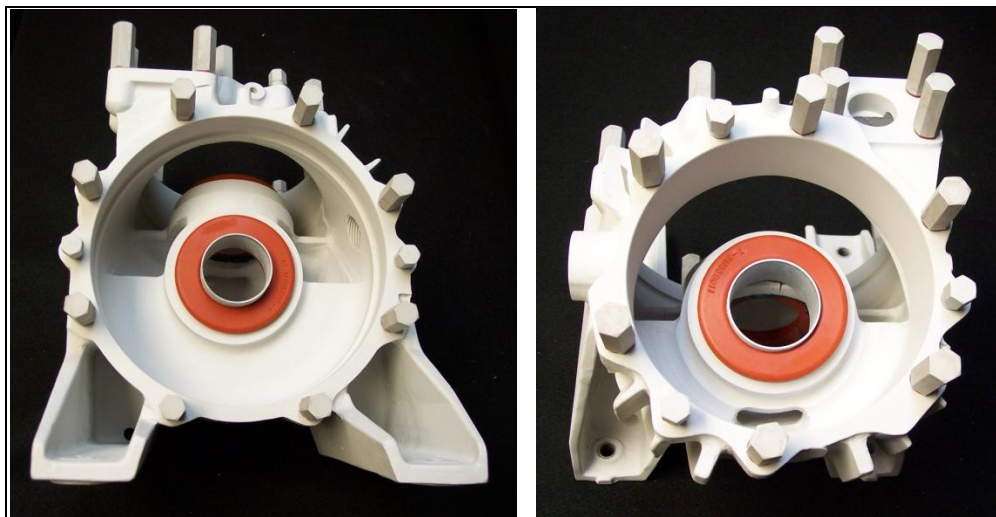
Installation of Acme masking tools on steel liners of H-64 intermediate gearbox.
